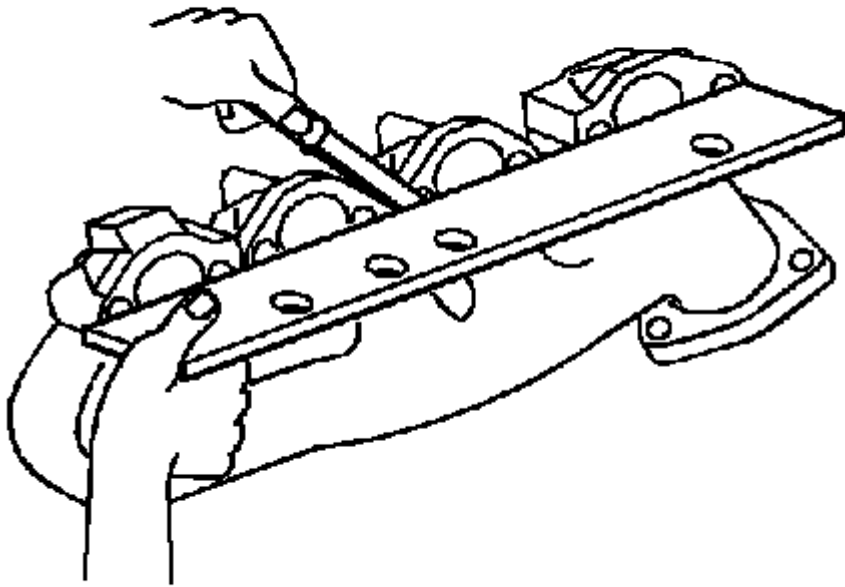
Measuring Exhaust Manifold To Cylinder Head Surface For Warpage
